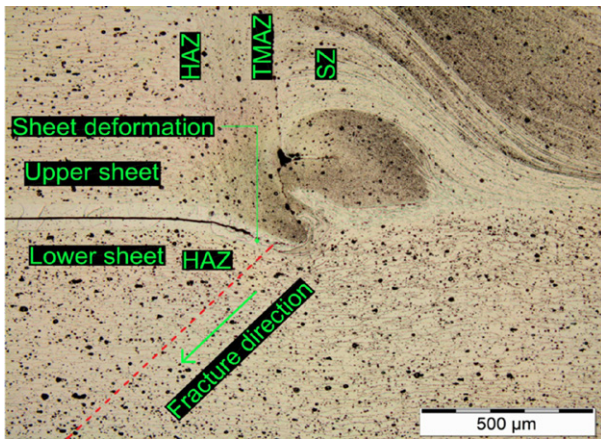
Macroscopic image of the weld corner with visible deformation of the lower sheet and with the direction of cracking marked
